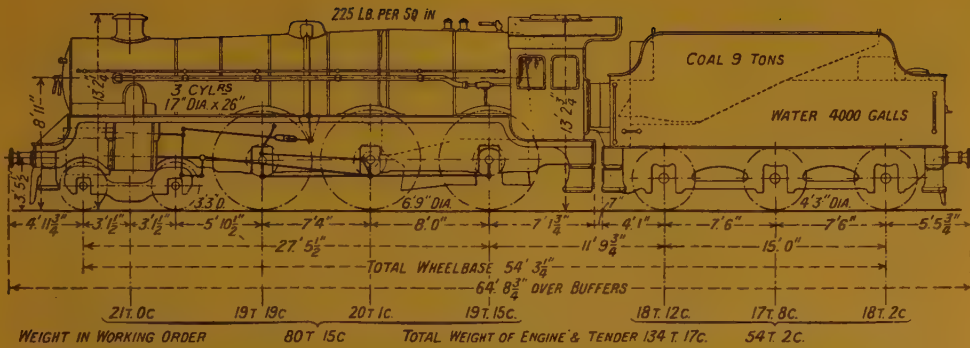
Diagram drawing showing principal dimensions and weight distribution with 4 000 gallon tender.
